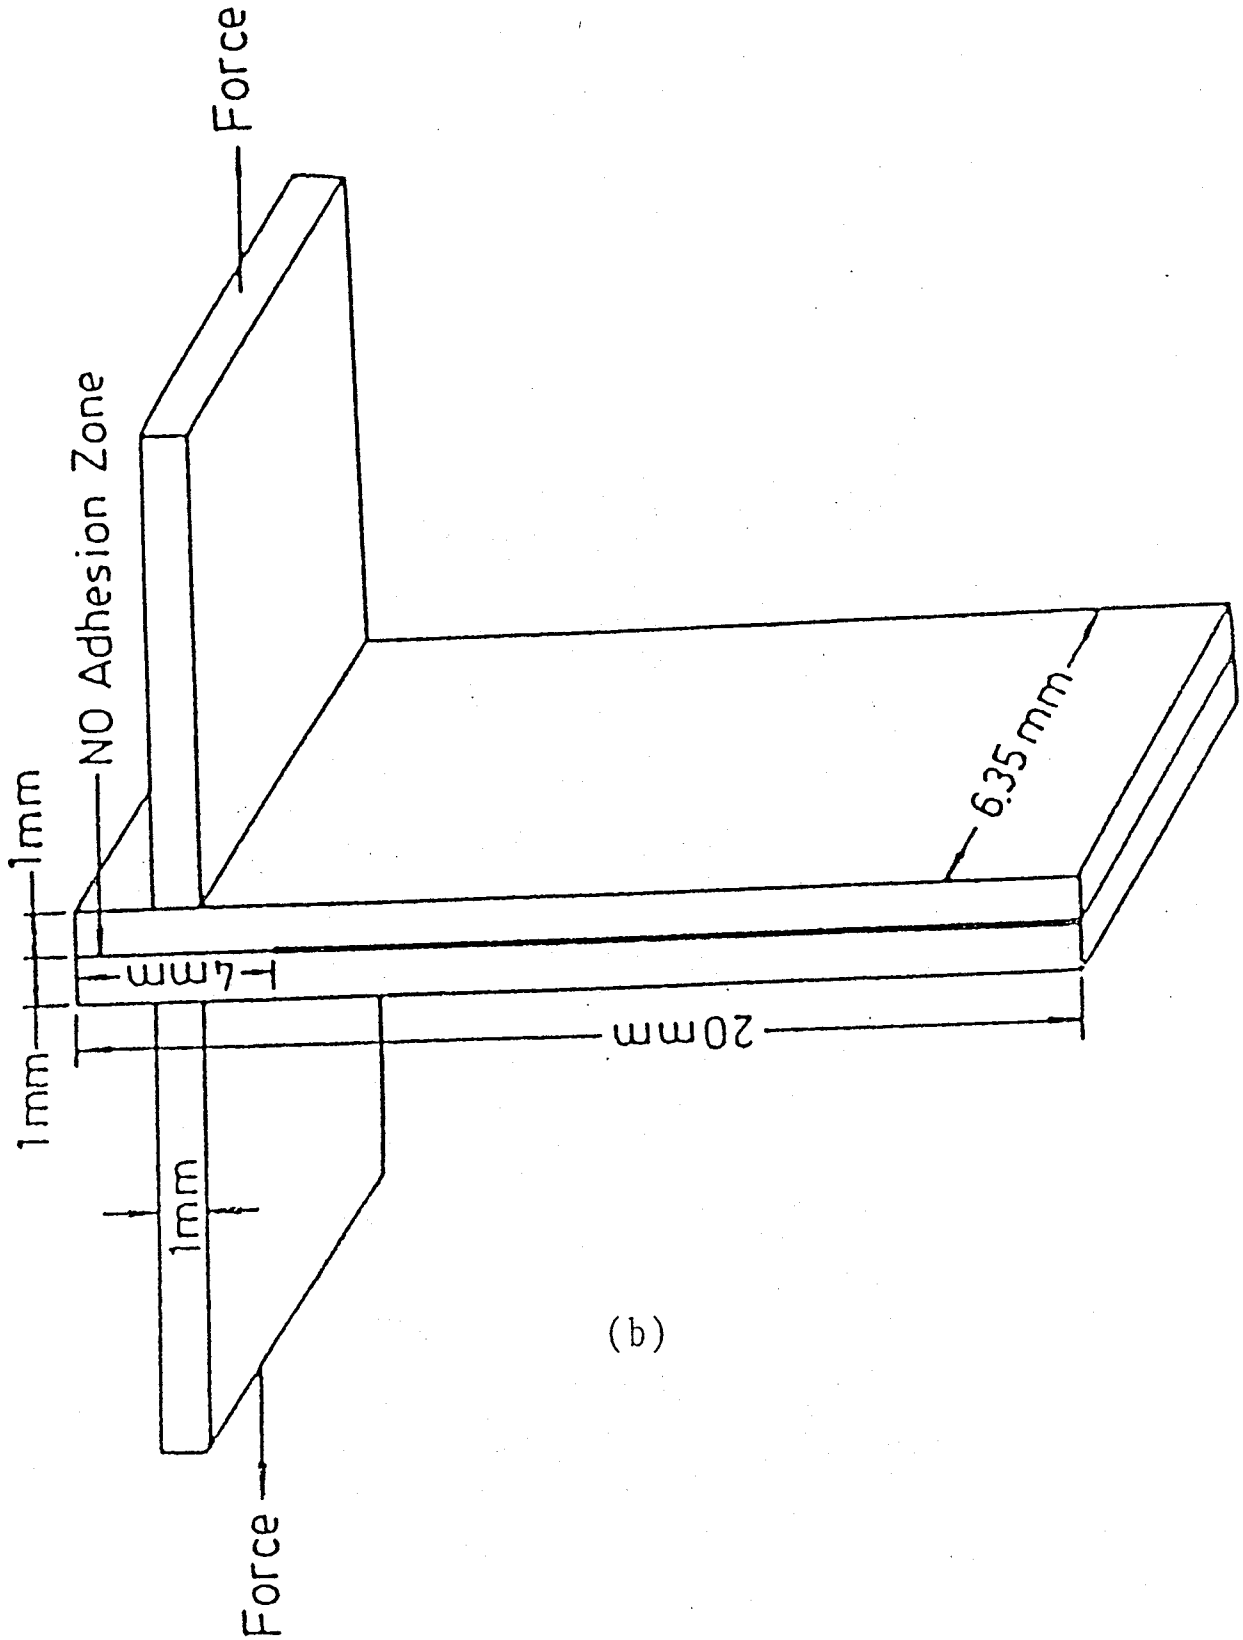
Schematic diagrams of solvent-welding testing instruments:
